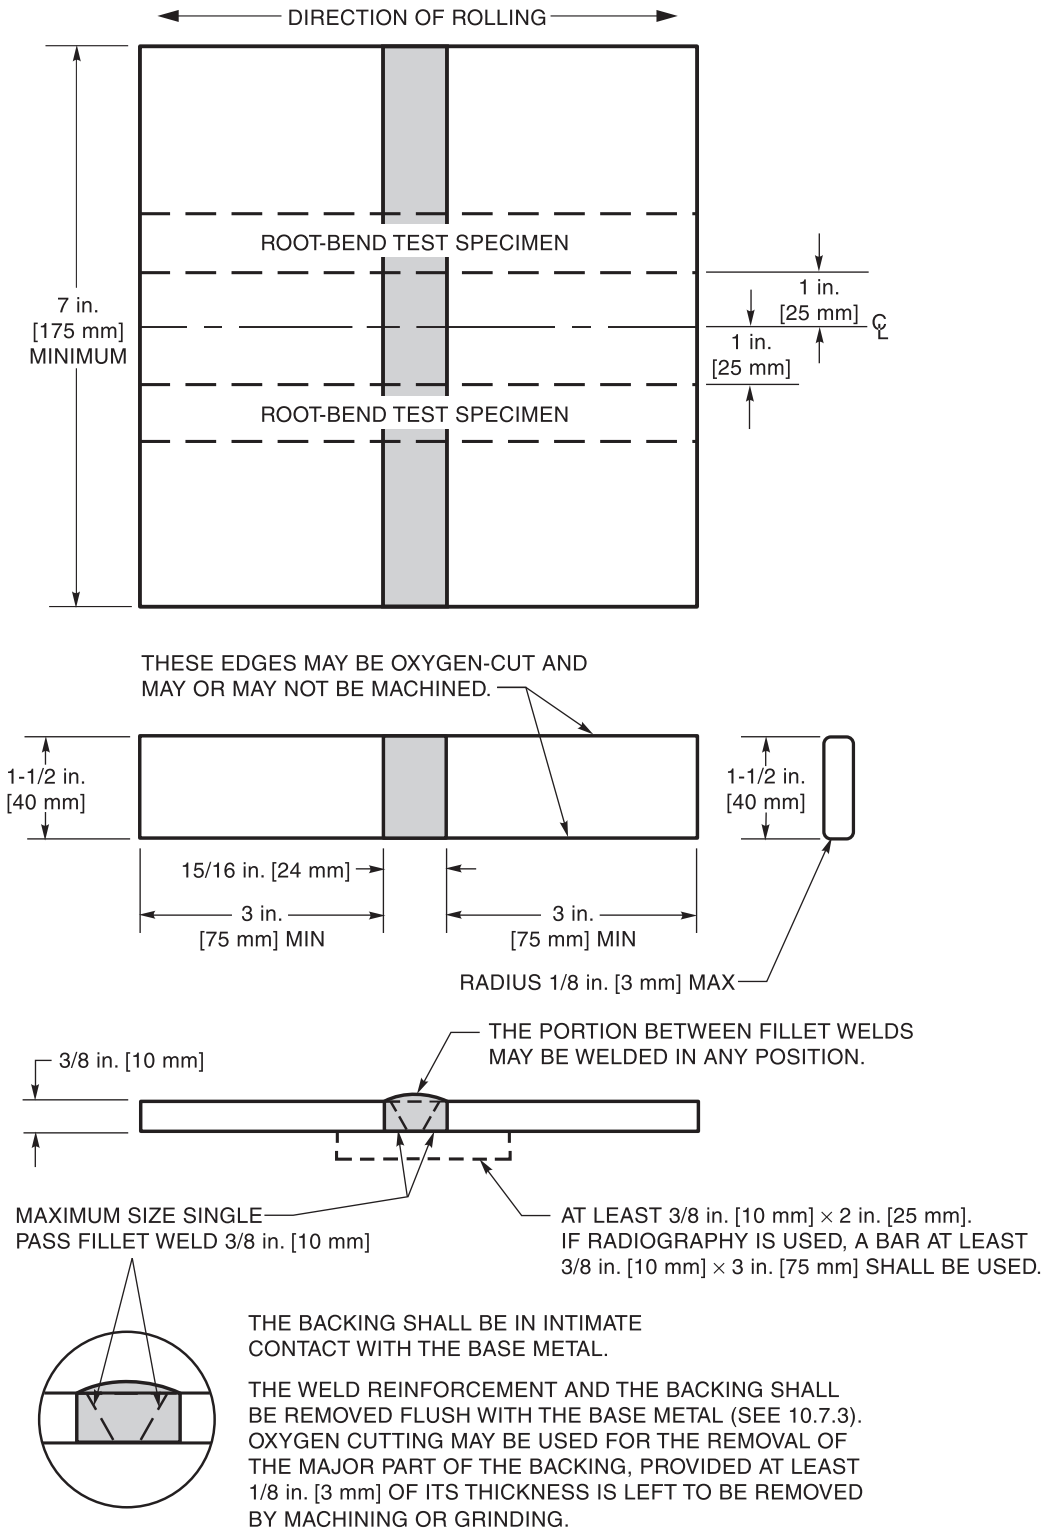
Fillet Weld Root-Bend Test Plate—Welder Qualification, Option 2
